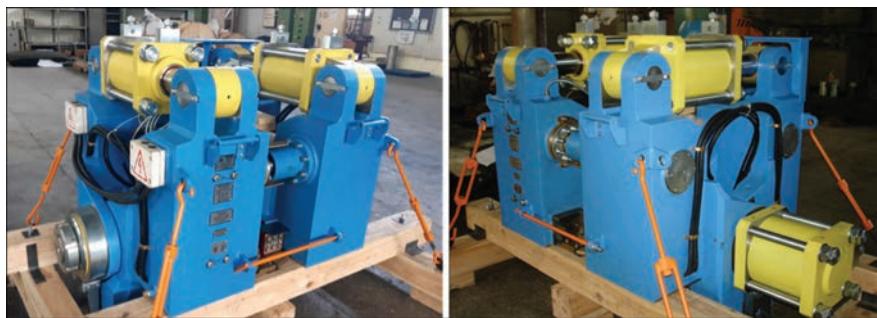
Welding head of the RW1060 machine for FBW of railway rails in hard-to-reach locations
